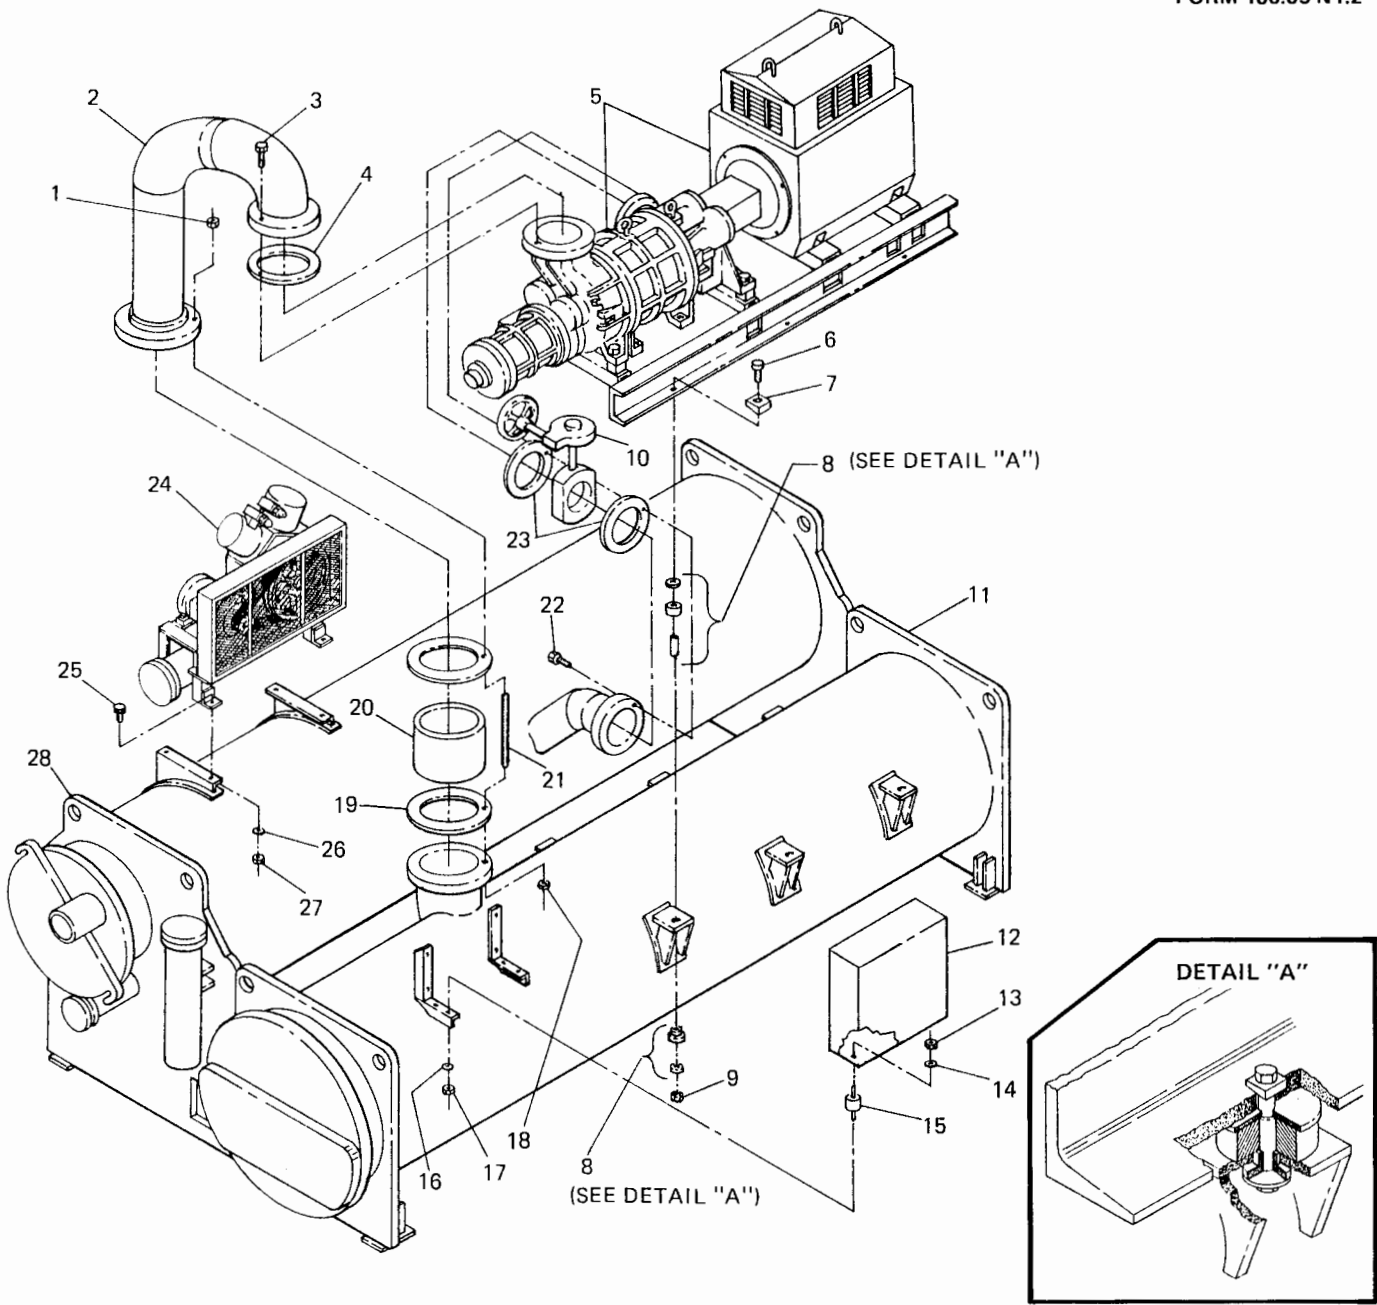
RIGGING COMPRESSOR/MOTOR/BASE ASSEMBLY
